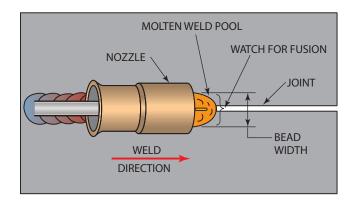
The shielding gas nozzle restricts the welder's view.
